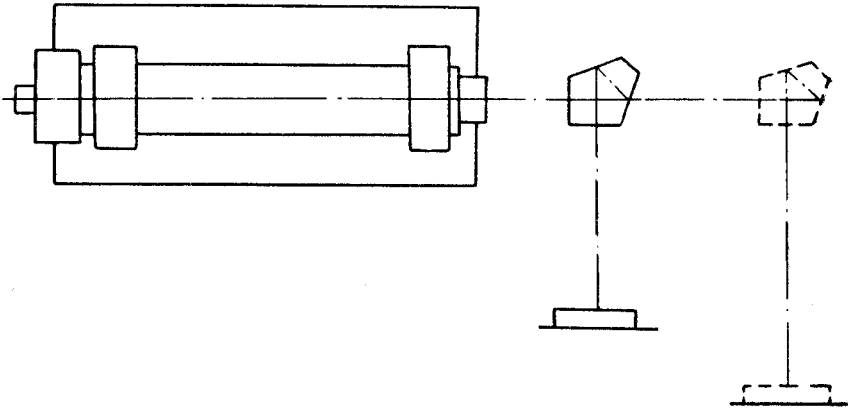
Diagram of Checking Non-parallelism of Two Surfaces
